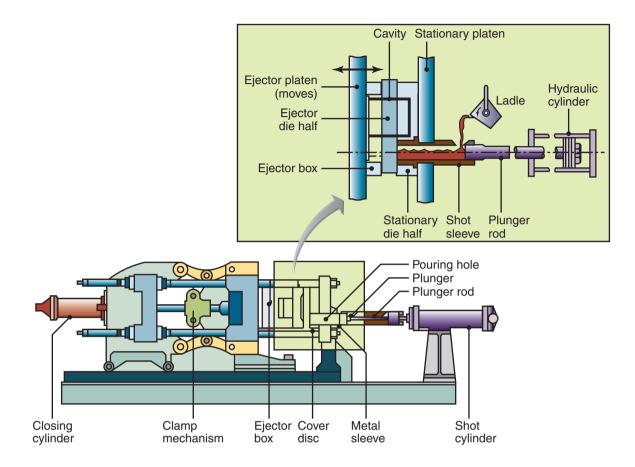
Schematic illustration of the cold-chamber die-casting process. These machines are large as compared to the size of the casting, because high forces are required to keep the two halves of the dies closed under pressure.
